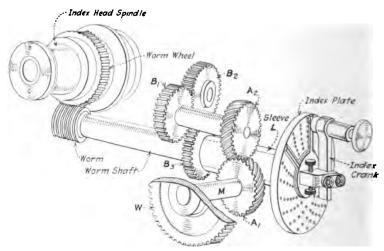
Spiral head gearing (B. & S.). Motion transmitted from W through M to A_1 to A_2 to B_1 and B_2 (idler) to B_2 , through sleeve L to index plate to index crank to worm shaft, worm, worm wheel, spindle and work.
